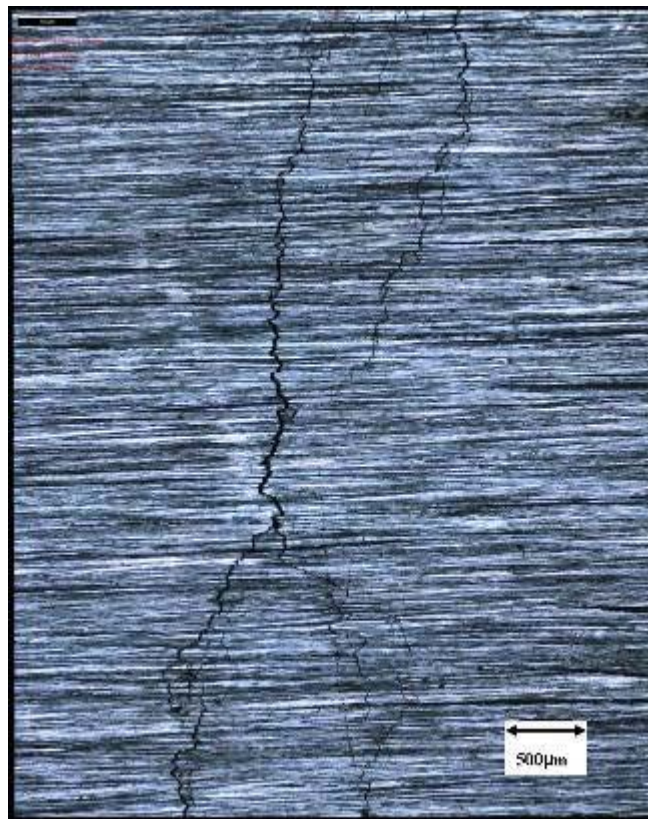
Artificially Grown Stress-Corrosion Crack in Coupon of Alloy 182 Weld Metal
